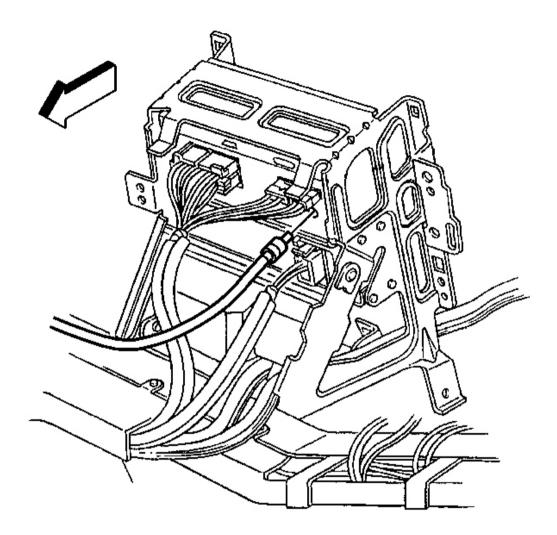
Power Antenna Coaxial Extension Cable At Radio Control Courtesy of GENERAL MOTORS CORP.
